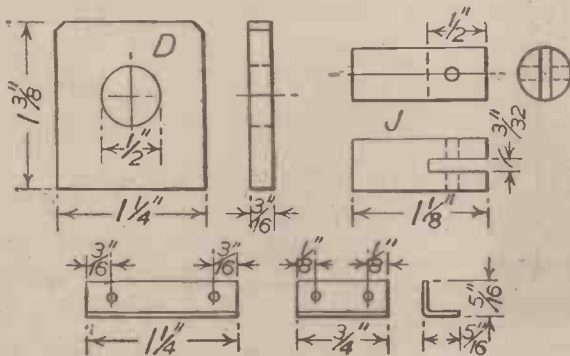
Details of bobbin ends, supporting angles and plunger.
